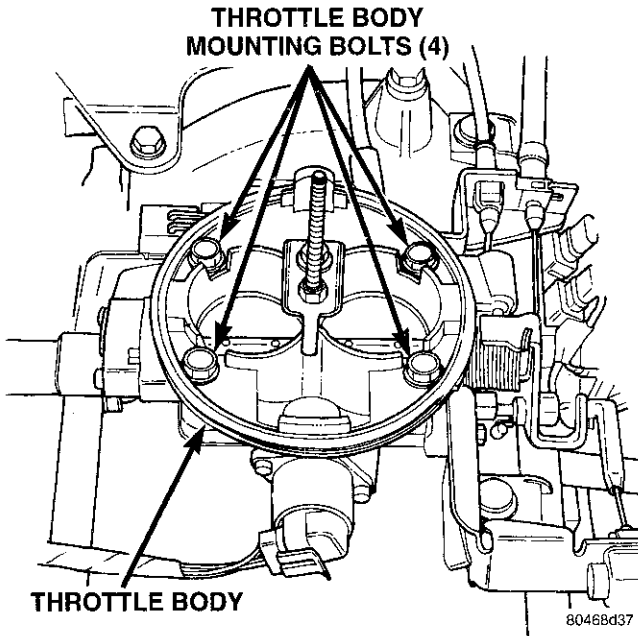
Throttle Body—3.9L/5.2L/5.9L Engines
